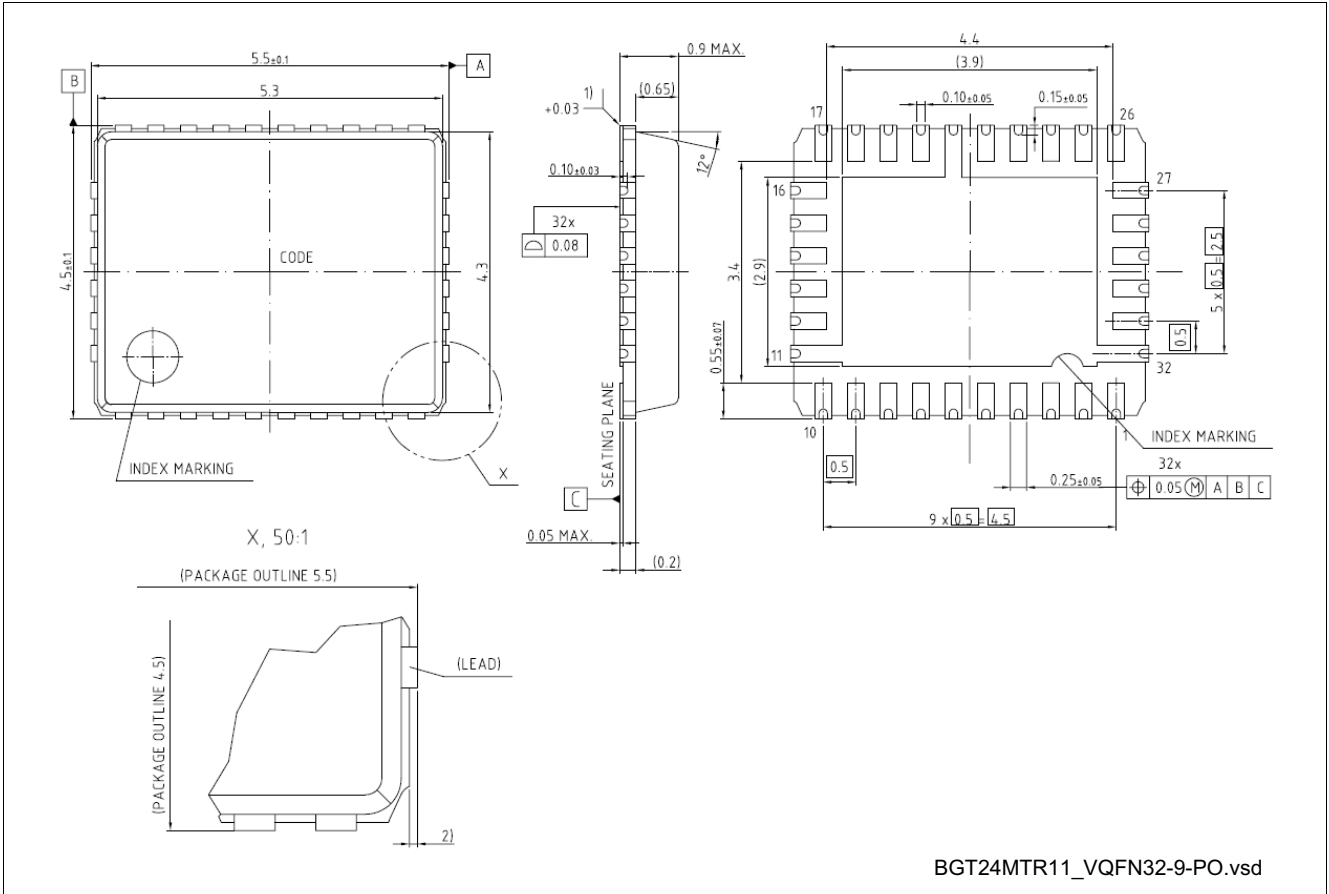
Package Outline (Top, Side and Bottom View) of VQFN32-9
